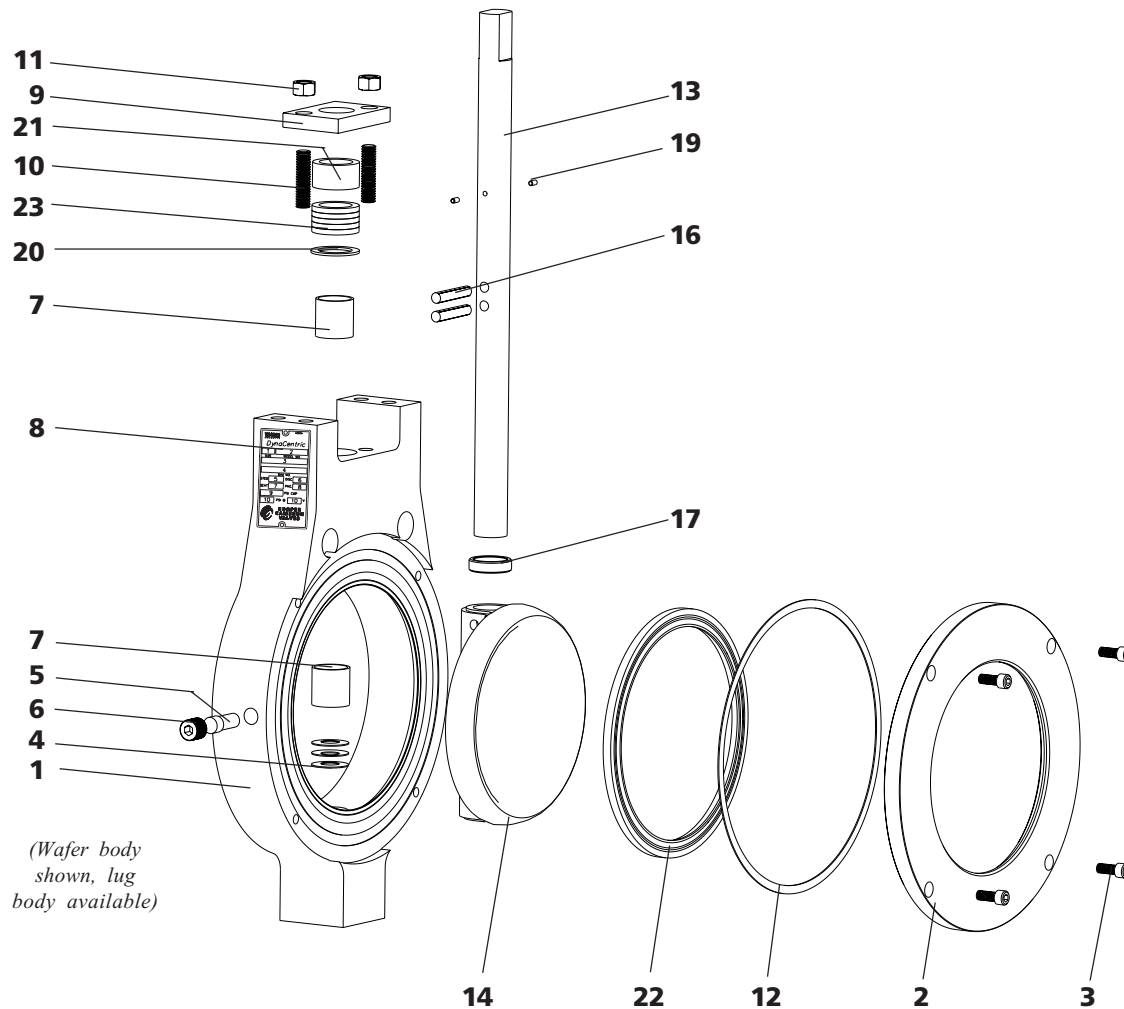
Cooper Cameron Valves' W-K-M 3"-12" Class 150, 3"-10" Class 300, 3"-8" Class 600 DynaCentric Valve Components.
